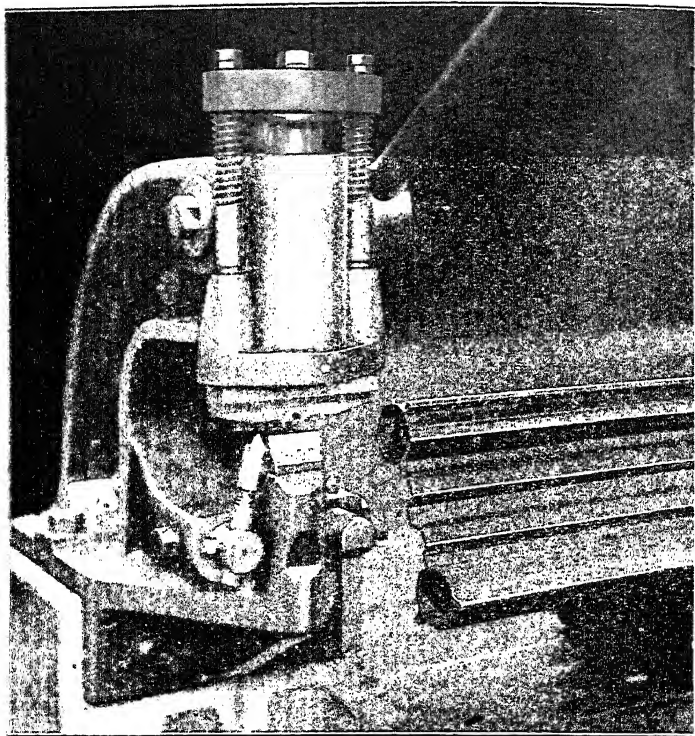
ARMSTRONG-WHITWORTH SPAR FLANGE PUNCHING MACHINE
